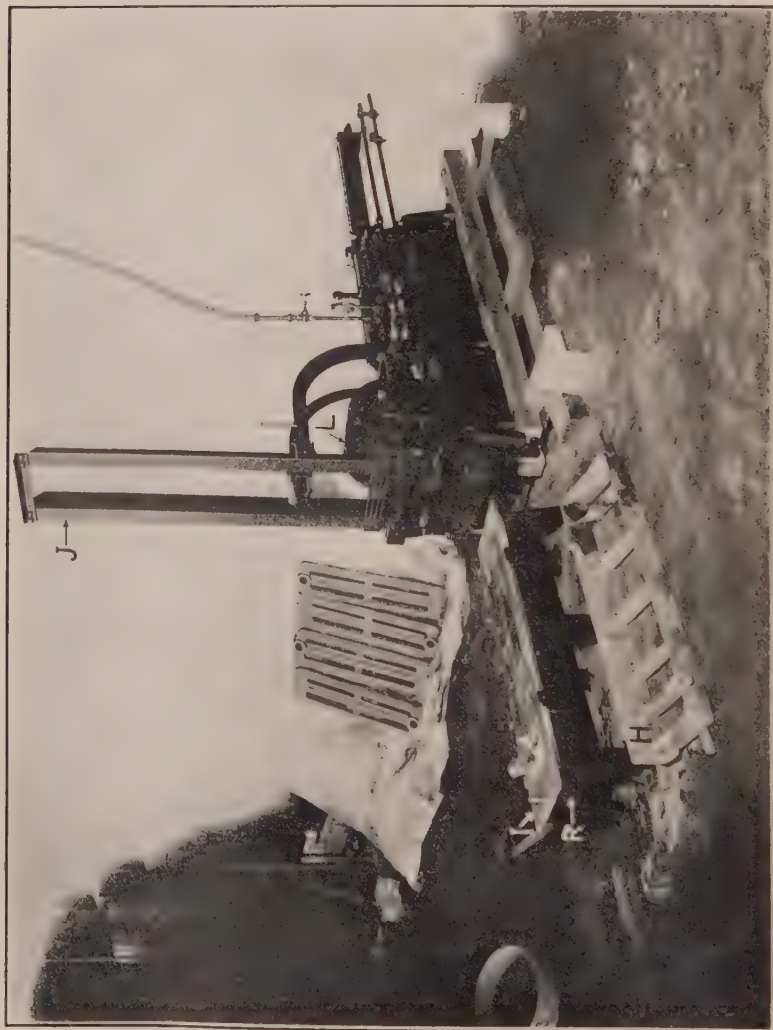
McDonald's Roller Machine before Ramming a Mold.
